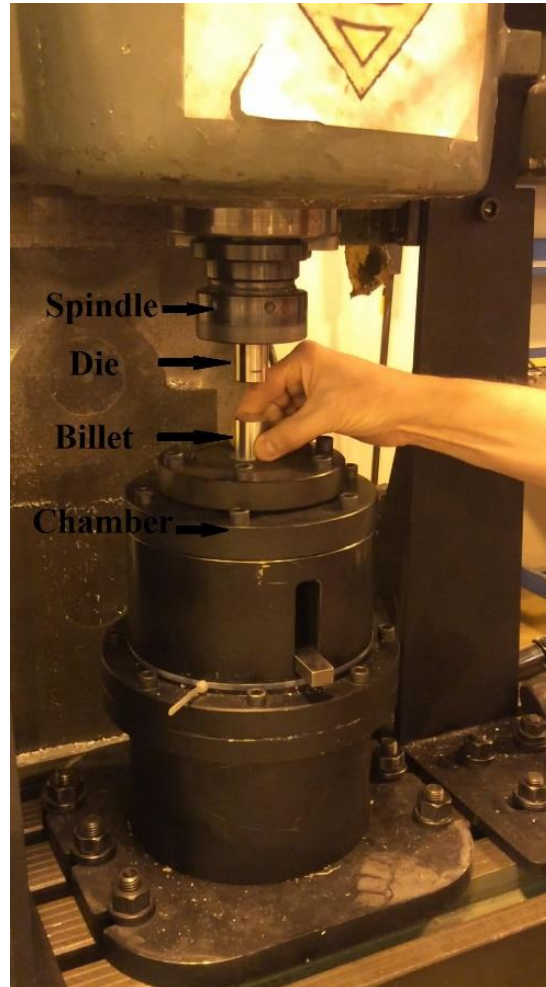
Experimental setup of friction extrusion using modified milling machine
